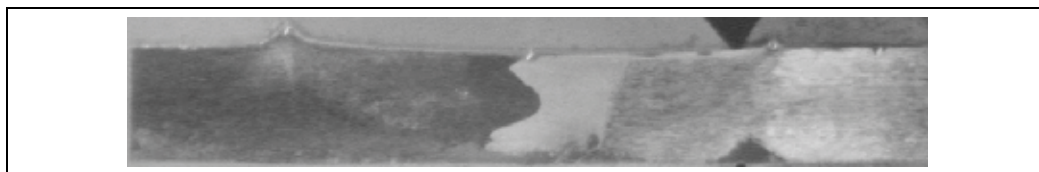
Image of the weld between 2198 and 7475 alloy plates.
